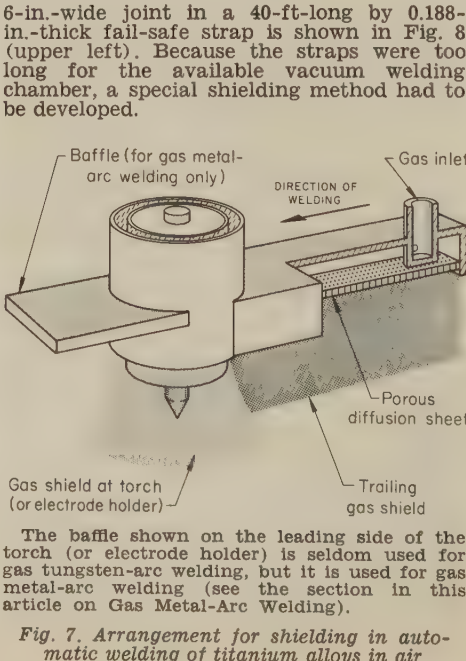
Arrangement for shielding in automatic welding of titanium alloys in air
